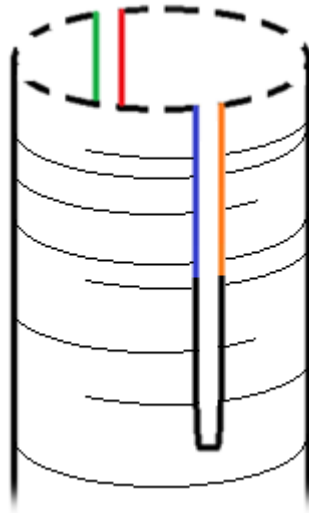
Schematic of a tube at the failure surface (dotted), sectioned to provide four visible regions (coloured) for fracture surface observation.
